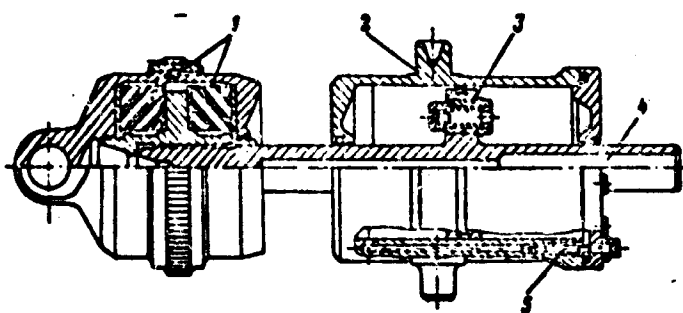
Damper with series-connected elastic element: 1 - elastic elements (rubber); 2 - housing; 3 - safety valve; 4 - rod; 5 - regulating needle.
